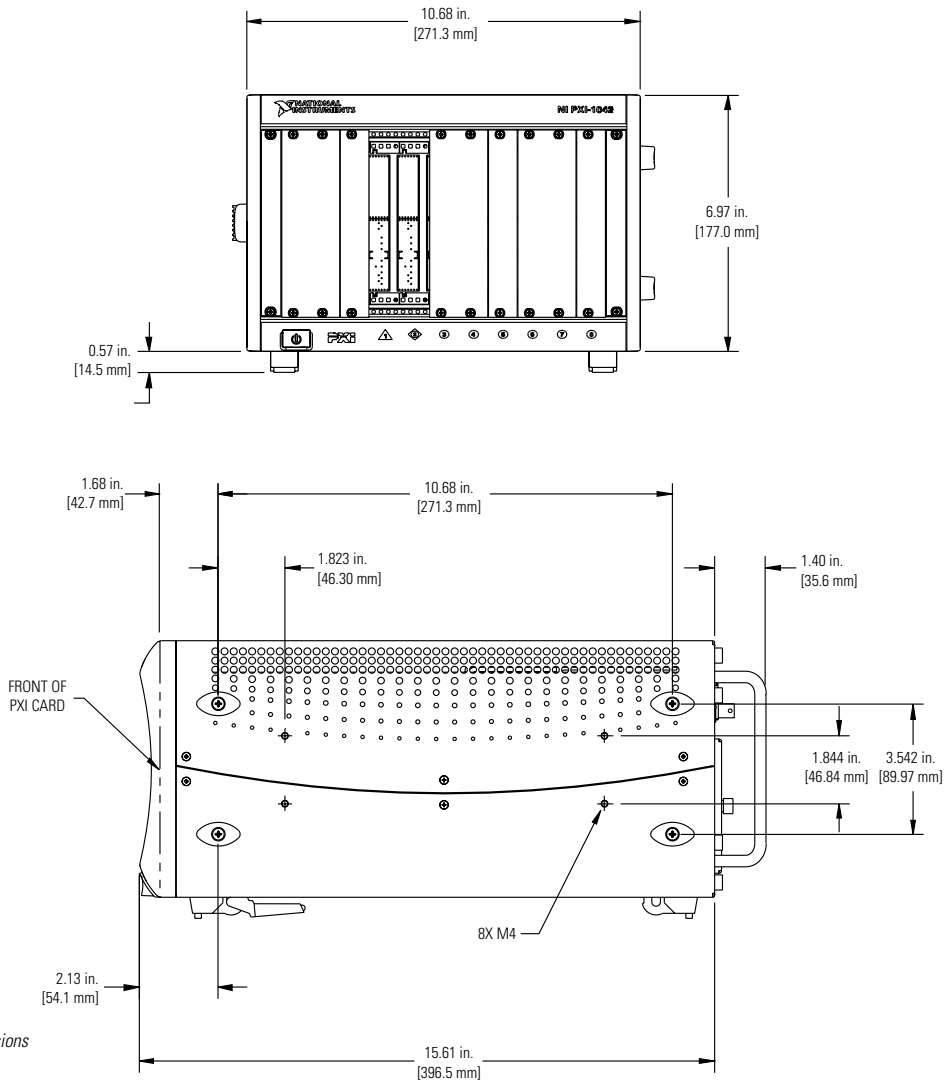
Front and Side Dimensions of the PXI-1042 Chassis
